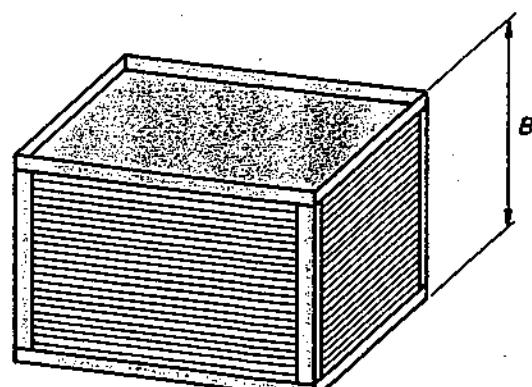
Schematic view of a plate heat exchanger Installed in horizontal position
